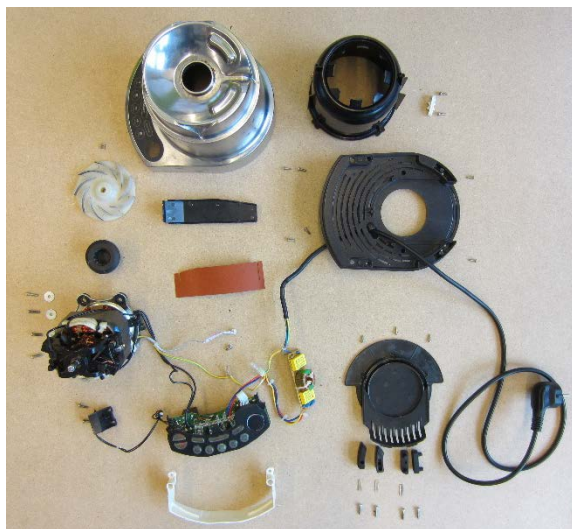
a “knolled” layout of the bottom motor-assembly of the Solis household blender.
